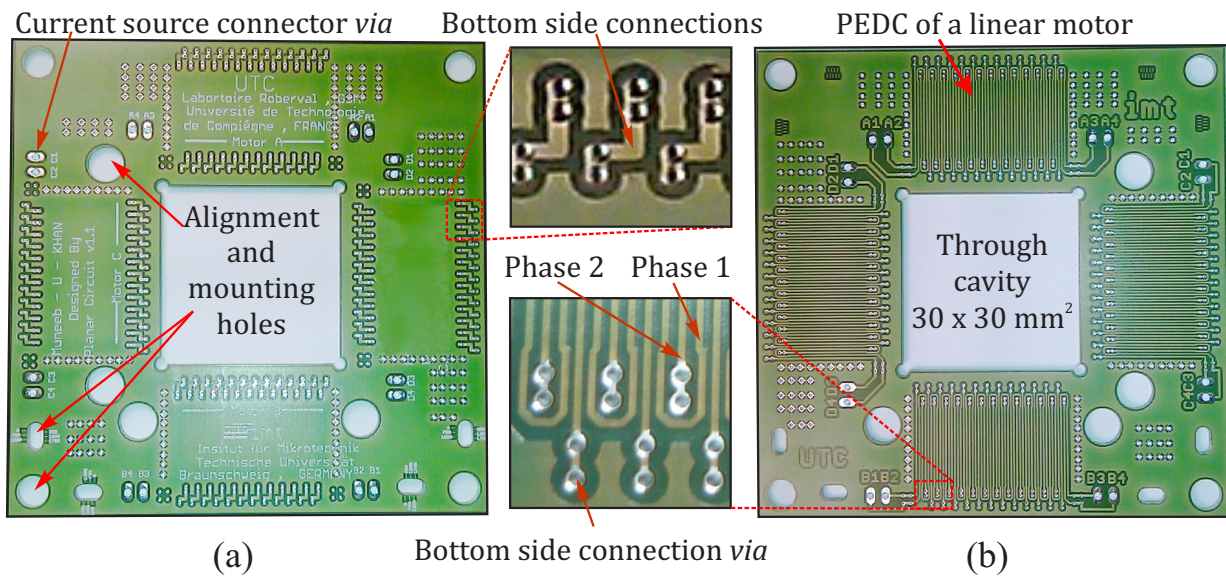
Fabricated PCB (a) Bottom view (b) Top view
